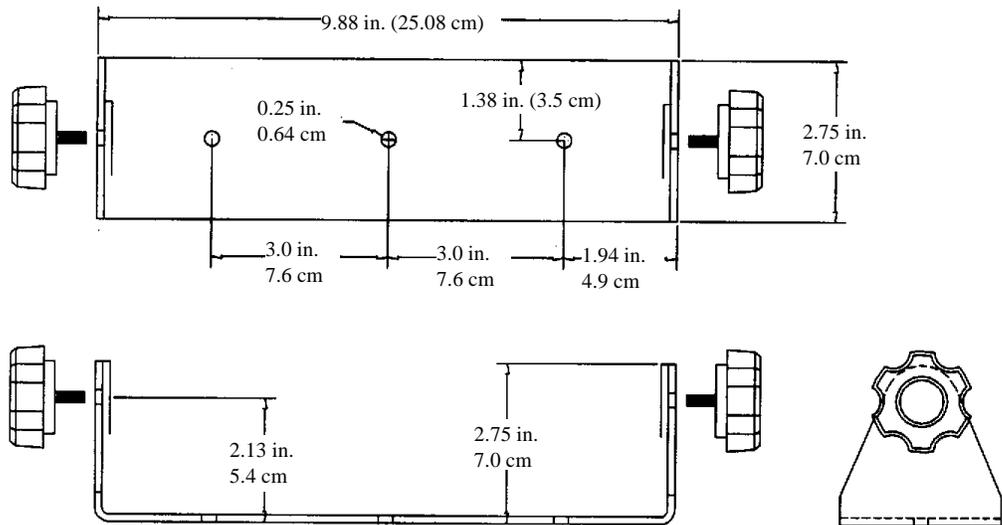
Desk Enclosure, Mounting Bracket Dimensions
